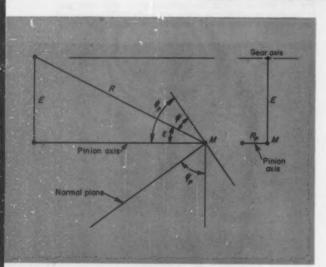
Pitch plane geometry of crown-type HRH gears.
